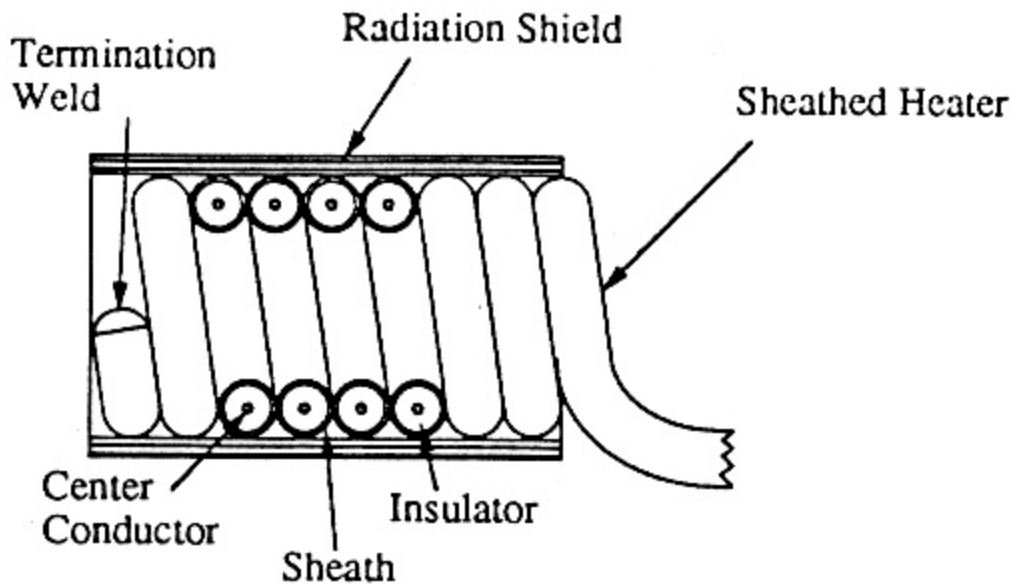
Diagram of the heater assembly designed for the International Space Station hollow cathode assembly (drawing not to scale).
